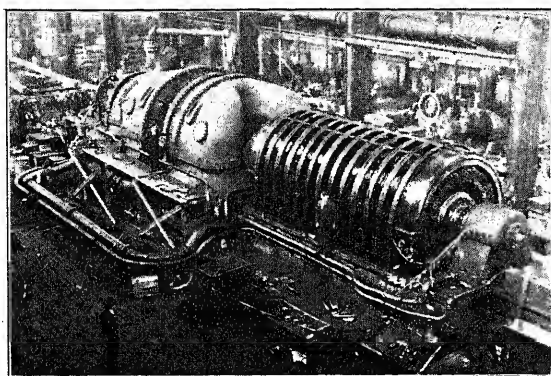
SHOP VIEW OF 59,000-KV-A., 1800-REV. PER MIN. STEAM TURBINE-ALTERNATOR UNIT SHOWING SKELETON FRAME CONSTRUCTION
